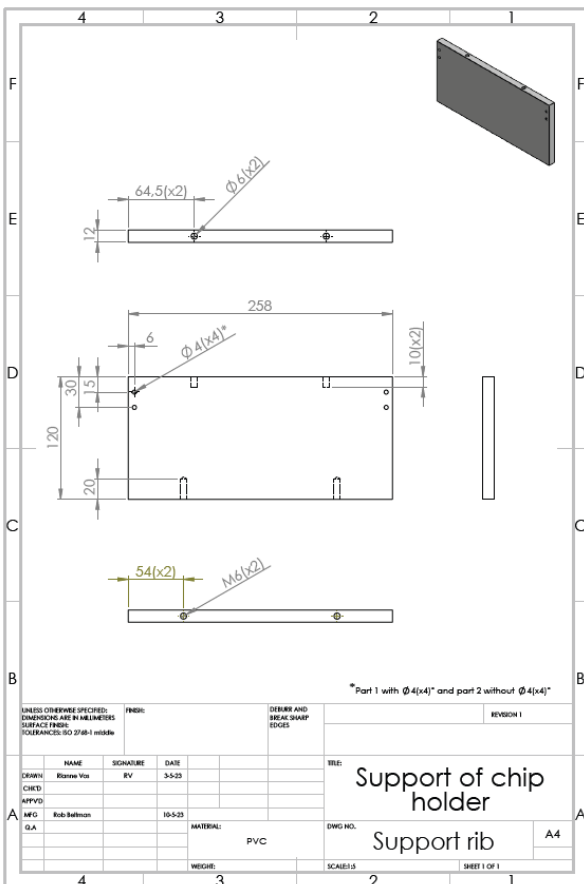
Drawing of the support ribs of the chip-holder created in SolidWorks with dimensions in millimeters (mm). The drawing serves as reference for the sawing, milling, and drilling production process.
